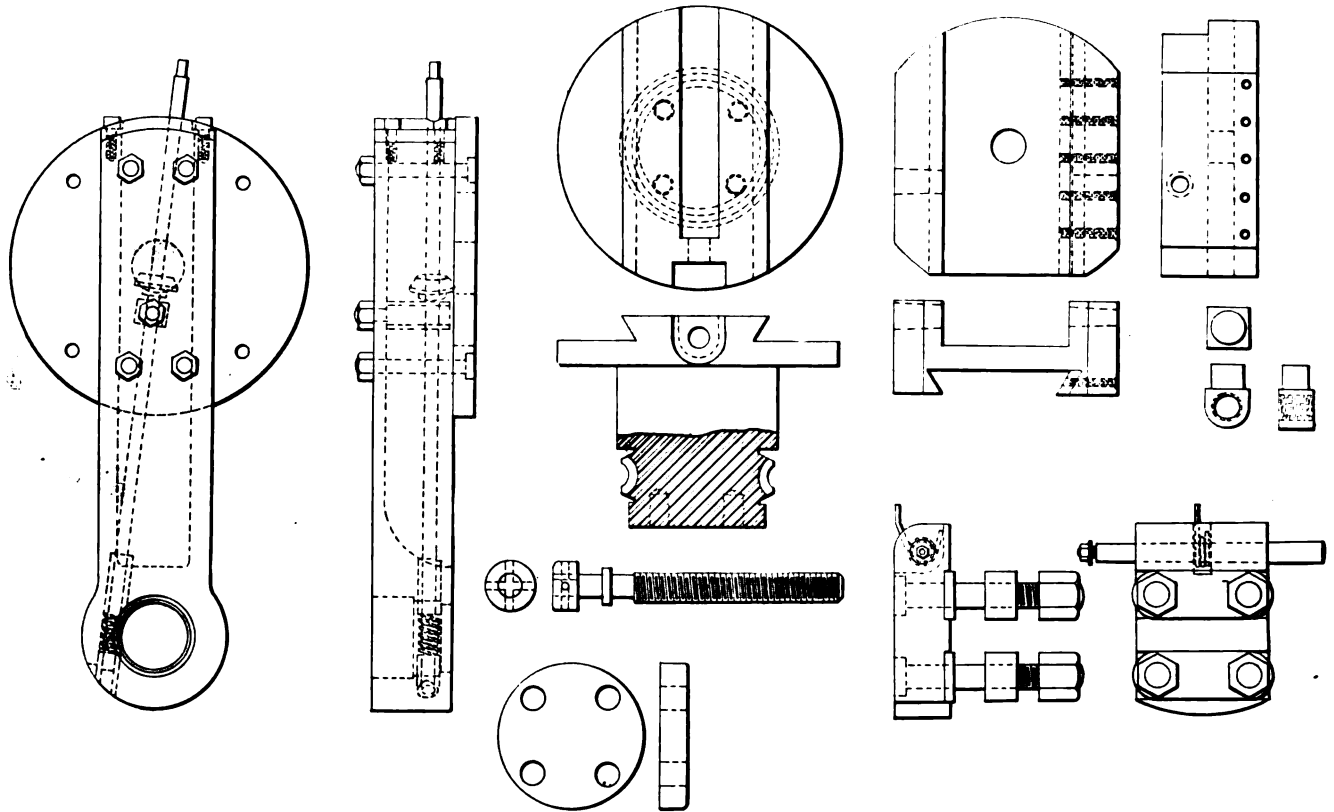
DETAILS OF TOOL SHOWN IN FIG. 1
